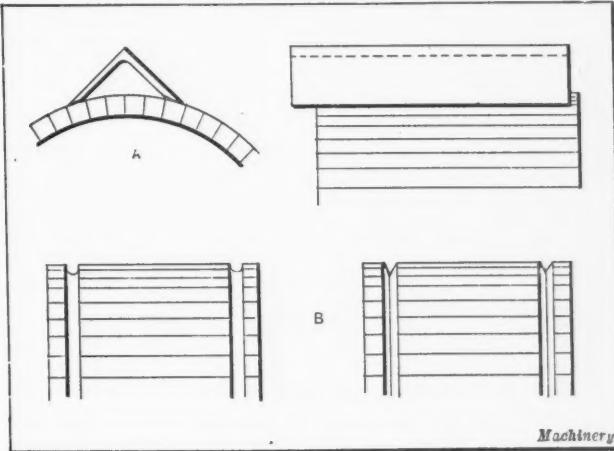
(A) Using Angle-iron as Guide in starting Grooves in Commutators; (B) Grooved Commutators
